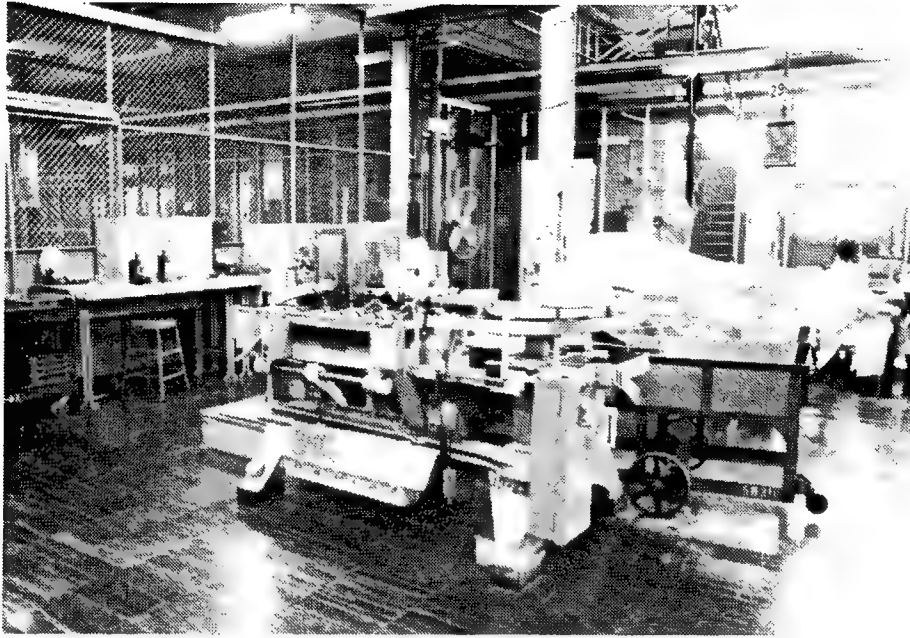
Building 3: Gage and Weigh Machine manufactured by Waterbury-Farrel located in the Ammunition Final Inspection Area.
